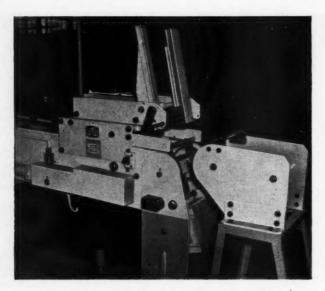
Developed by the Machine Tool Institute, this unit forms part of a complete standardized system designed for linking automatic-cycle machine tools to provide fully-automatic production lines
